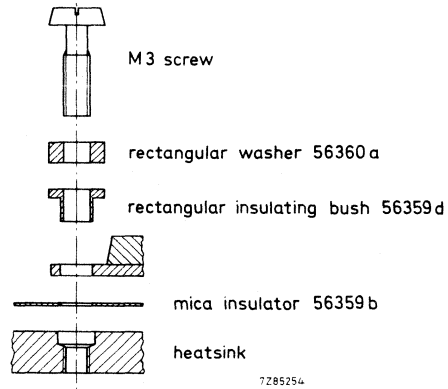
Insulated screw mounting with rectangular washer into tapped heatsink. Known as a "top mounting".
